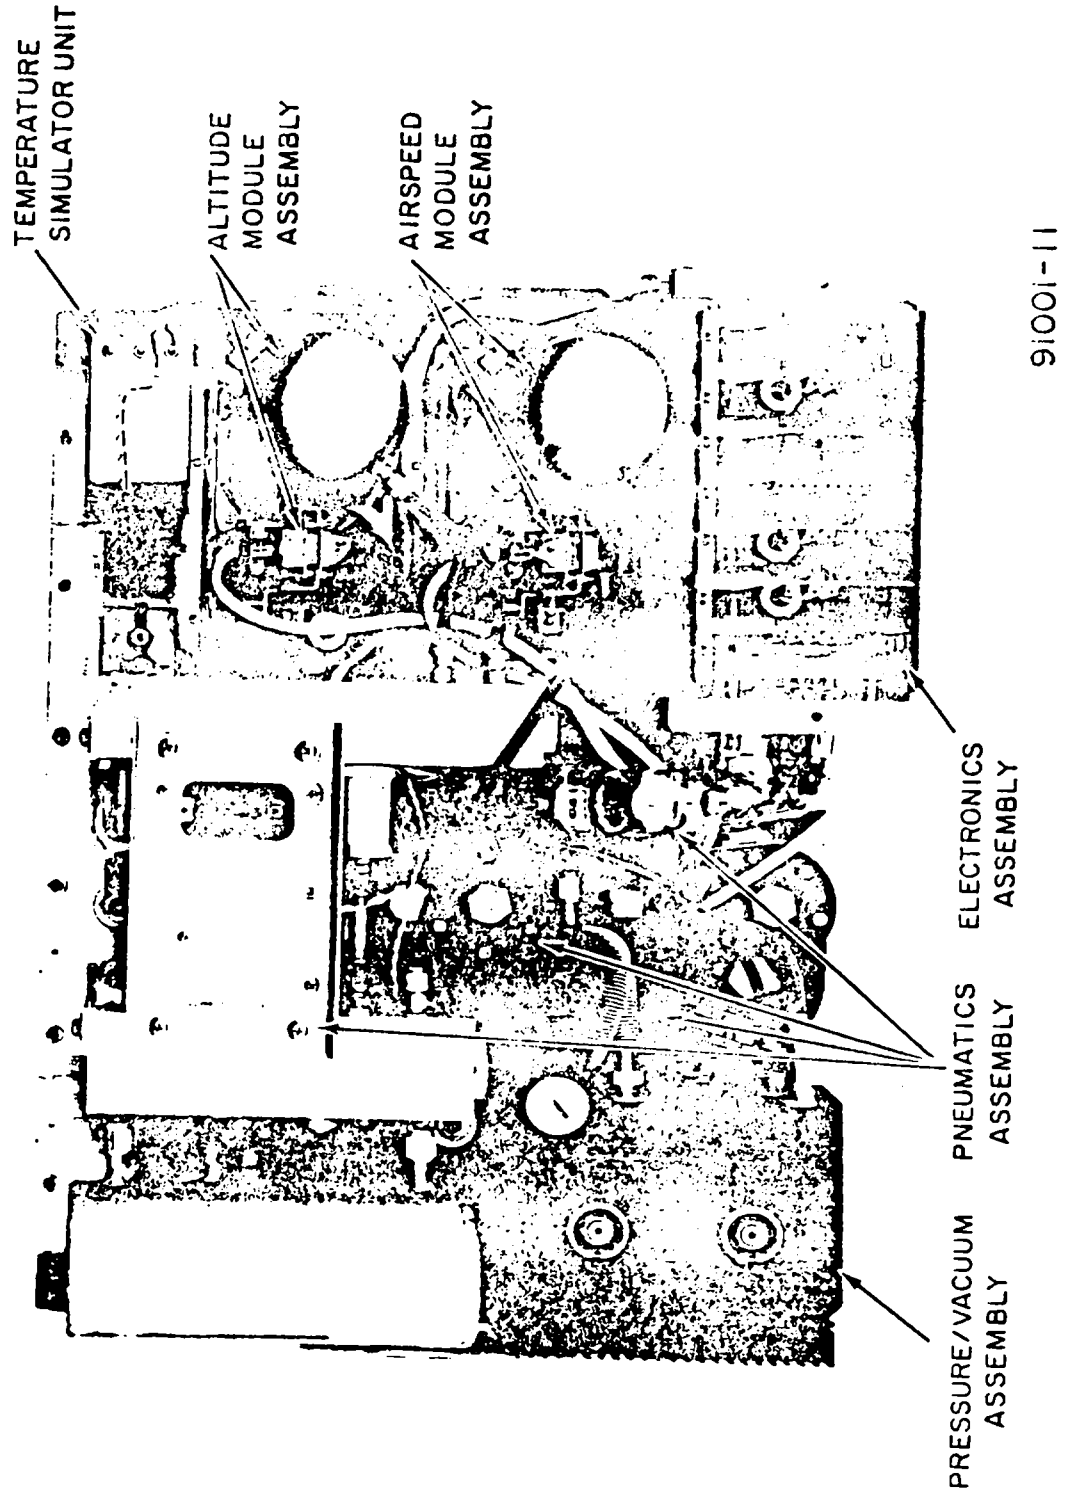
Pressure-Temperature Test Set TTU-205C/E Main Assemblies
